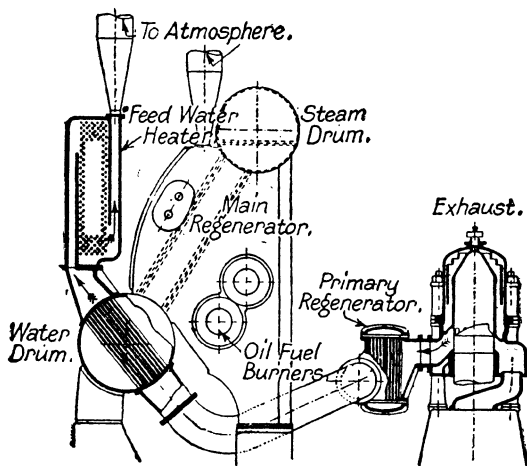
Regenerators in Scott-Still Marine Oil Engine
